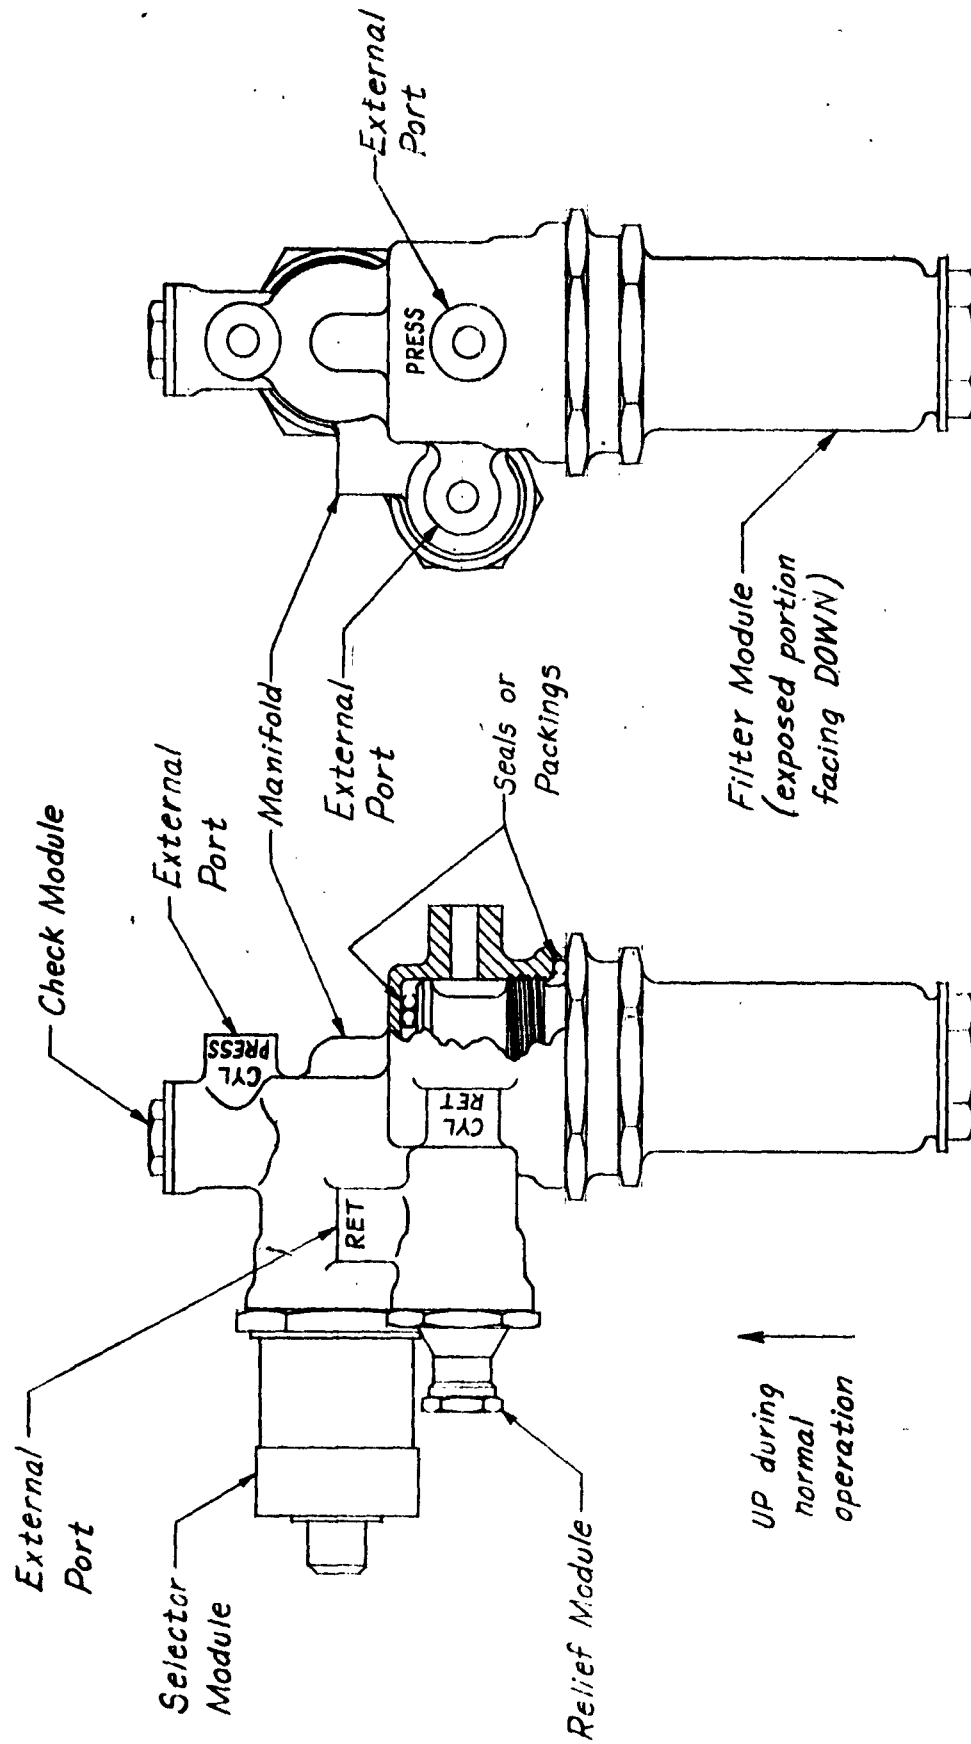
Typical modular hydraulic package showing manifold, standard modular components and metallic seals or packings.
